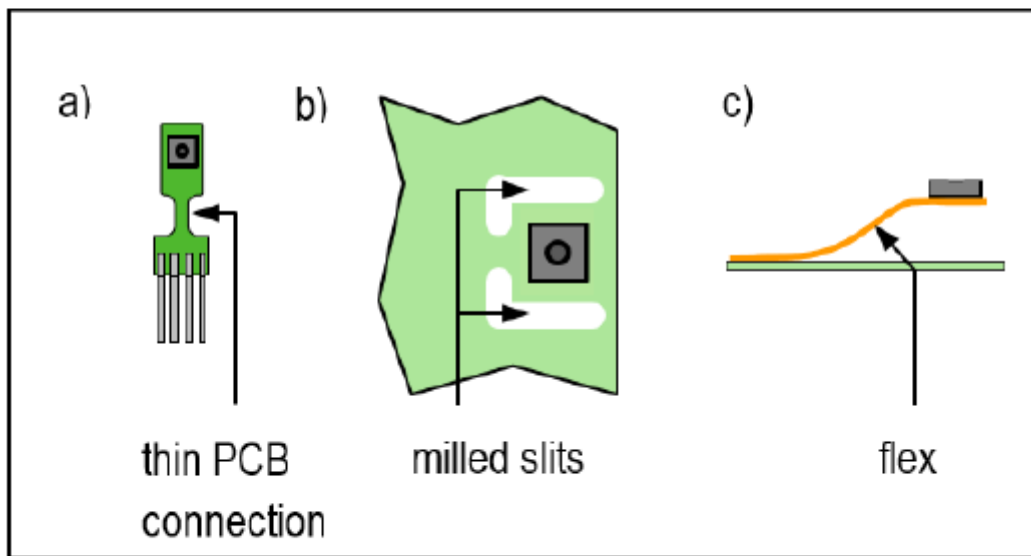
The sensor may be thermally decoupled from the PCB by small PCB connections or with a flex.
